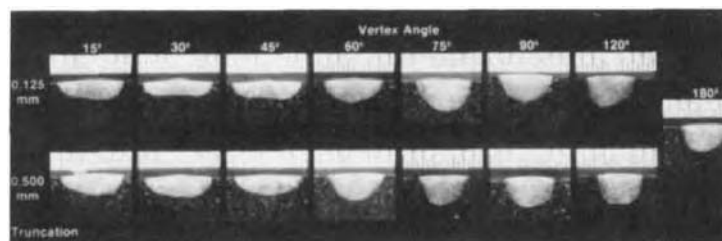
Fusion zone profile for bead-on-plate welds as a function of electrode tip geometry using 100% Ar as a shielding gas. Weld parameters: current, 150 A; welding speed, 3 mm/s (0.12 in./s)
